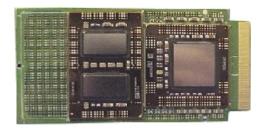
Intel® Itanium[™] processor packaging shows how different elements of packaging can be combined
